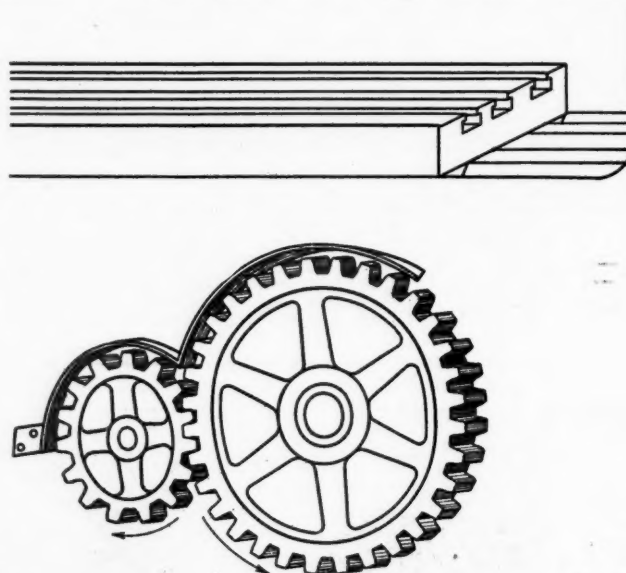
Improper Form of Rim Guard for Gear Wheels.
